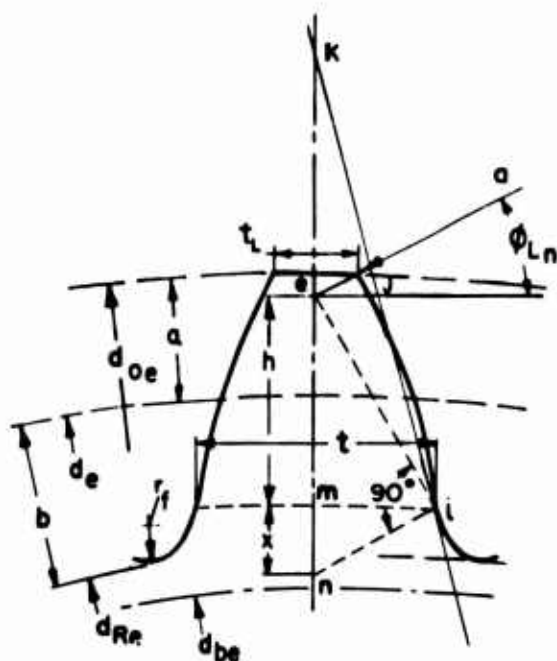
Helical Tooth Form Factor Layout-Y_c
